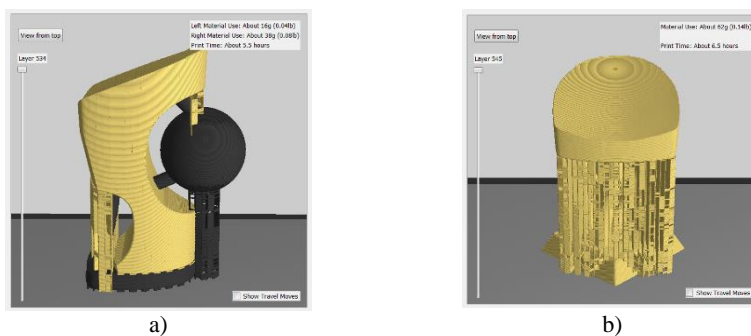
3D printing overview with support structure: a) prototype 4, b) prototype 7
